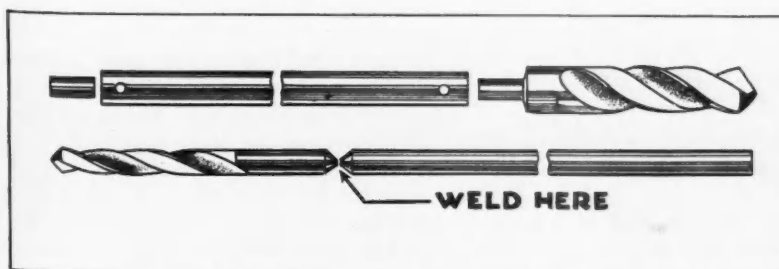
Extension drills were formed by welding to bore holes through the sides of refrigerator bodies to permit use of through bolts instead of screws
